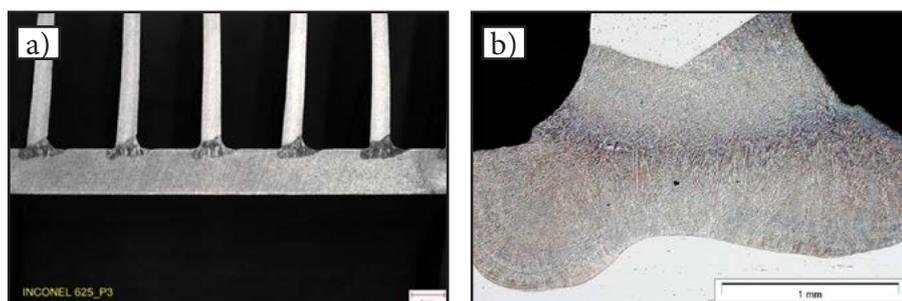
Structure of the laser-welded fin tube made of alloy Inconel 625: a) macrostructure b) microstructure of the tube-fin joint
